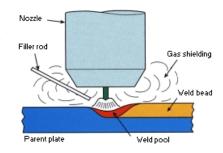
GTAW (TIG) Welding (Courtesy The Welding Institute)
